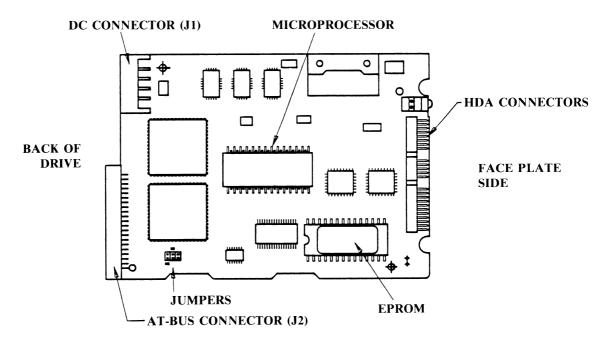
Shorting Plug Locations on the Drive PCB
